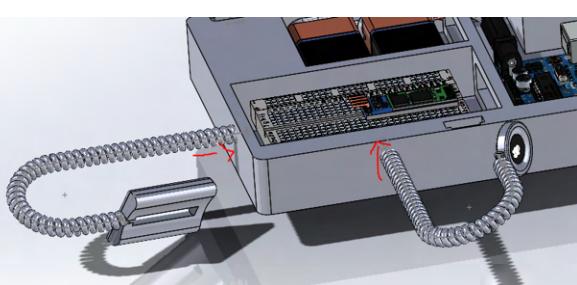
Coiled wires connected to breadboard in Mother Housing (connections not shown)
